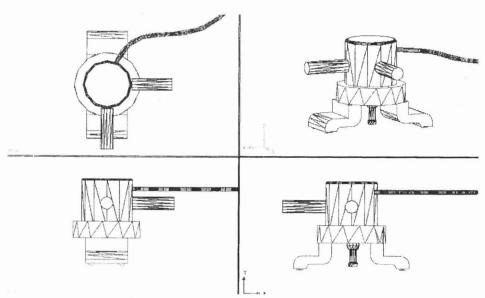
Four View Ports for Portable Steel's Chamfer Machine
